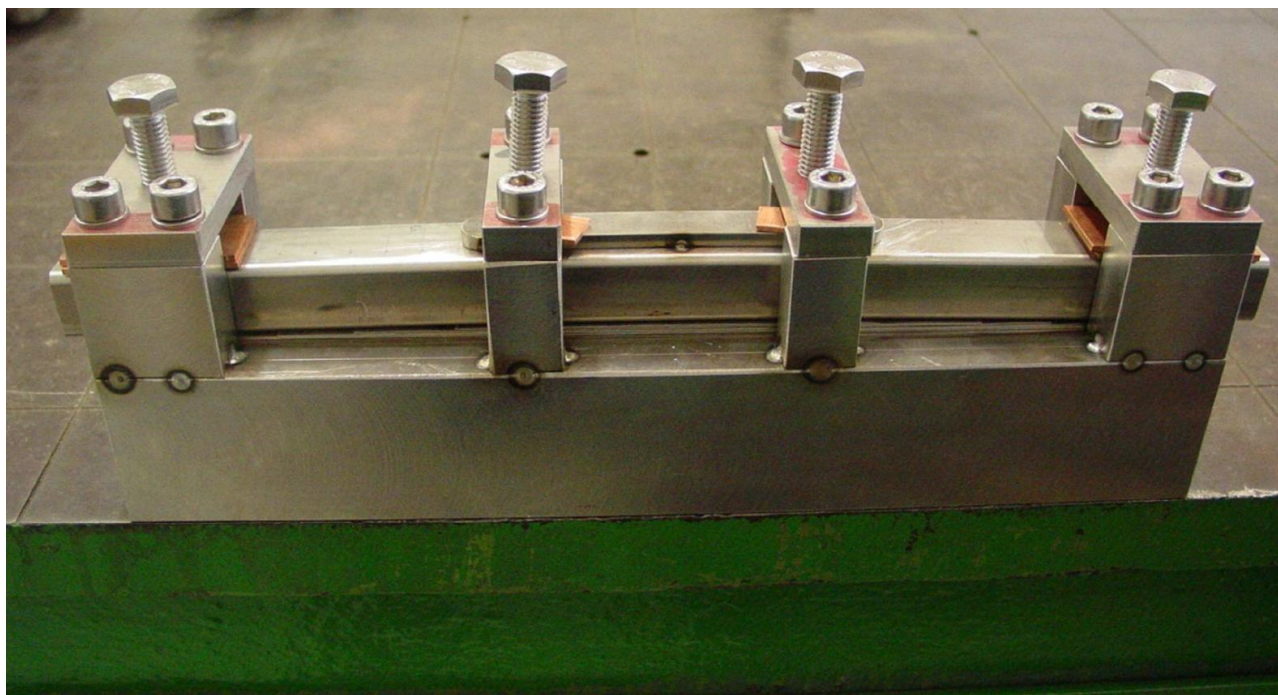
Tooling for He inlet pre-bending deformation before nozzle welding.
